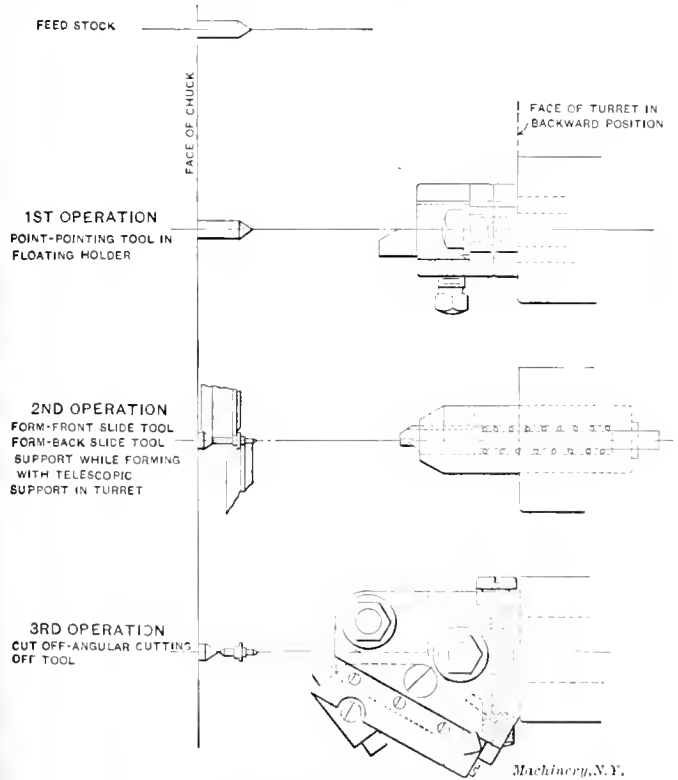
Tools Used and Order of Operations Followed in making the Pinion Blank shown in Fig. 1.
